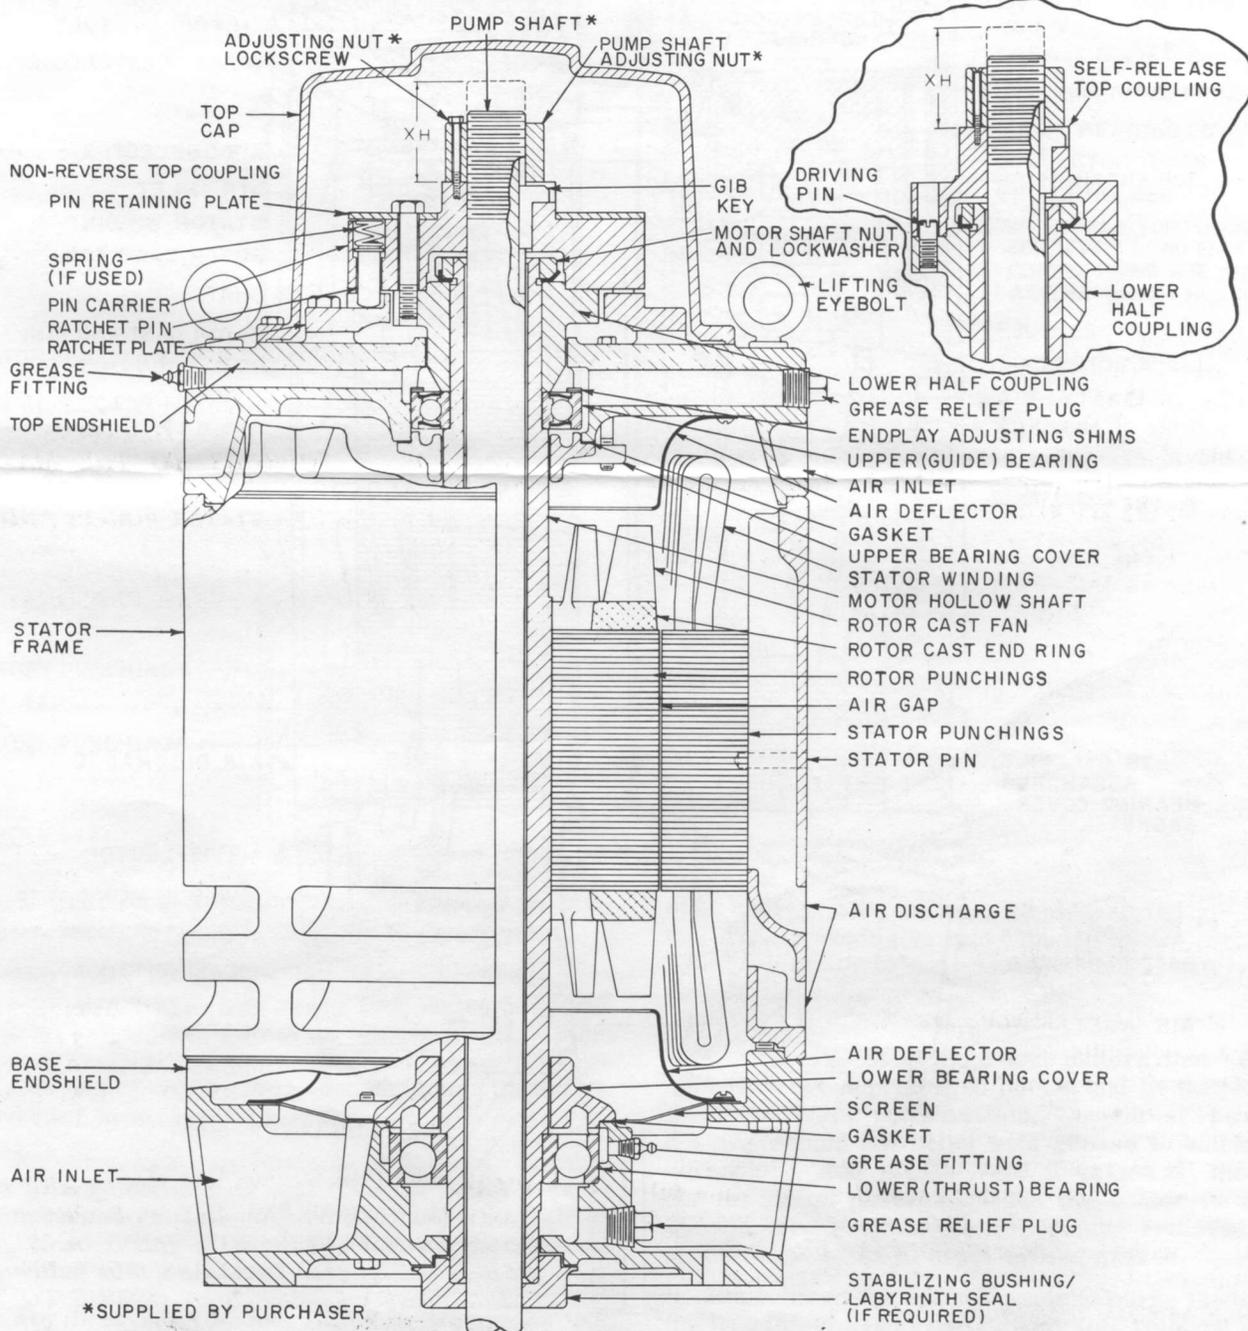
Typical high-thrust, hollow-shaft motor with non-reverse coupling. Self-release type shown in inset.
